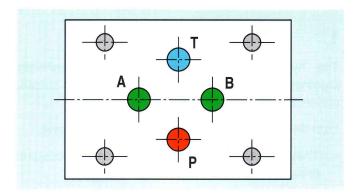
Mounting pattern, form A6 DIN 24 340 Mounting pattern size 6 preferrably used for directional valves, but also used for pressure and flow contol valves
